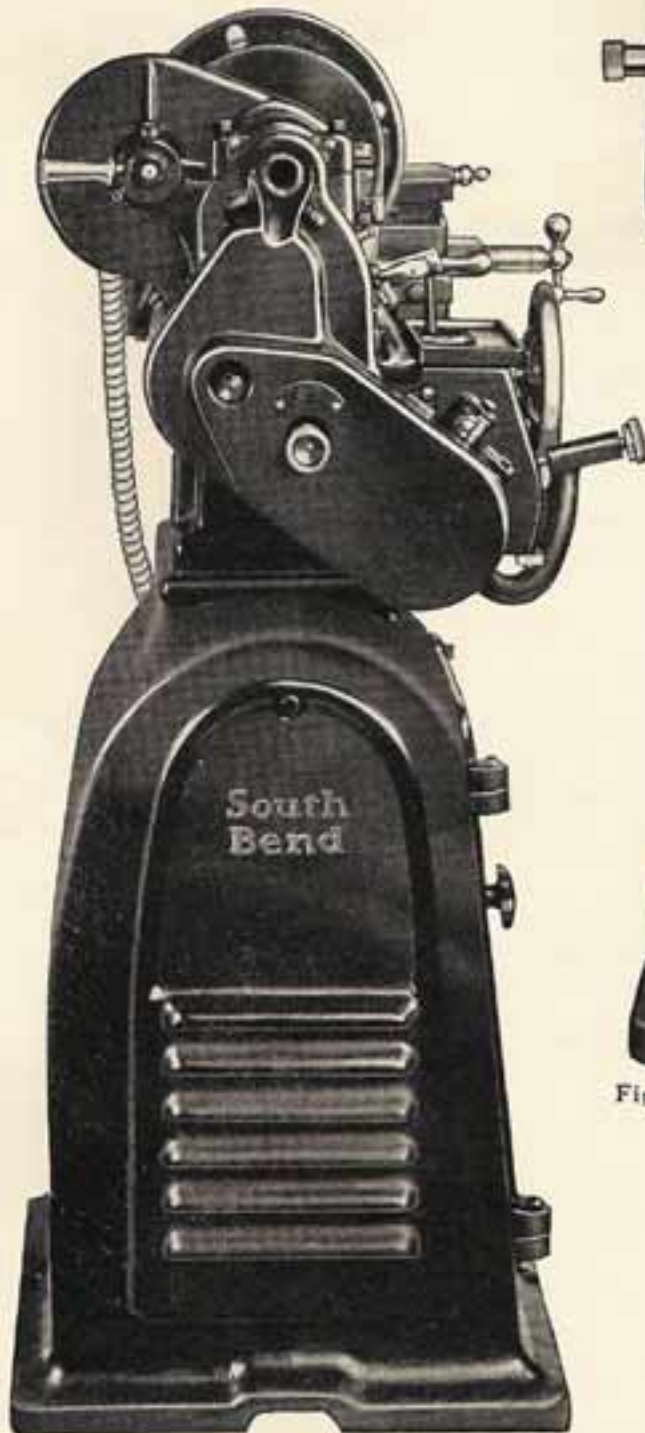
End view of underneath belt motor drive lathe showing removable ventilated end plate.
